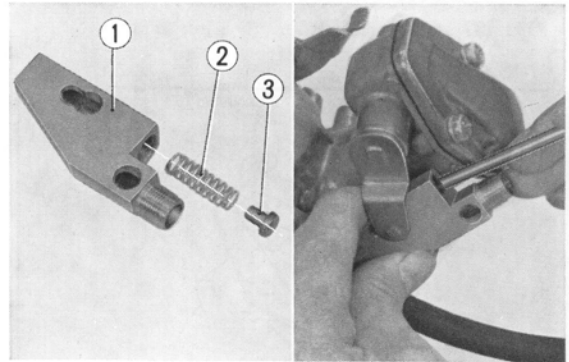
① Adjuster holder ② Coil spring B ③ Spring seat B
